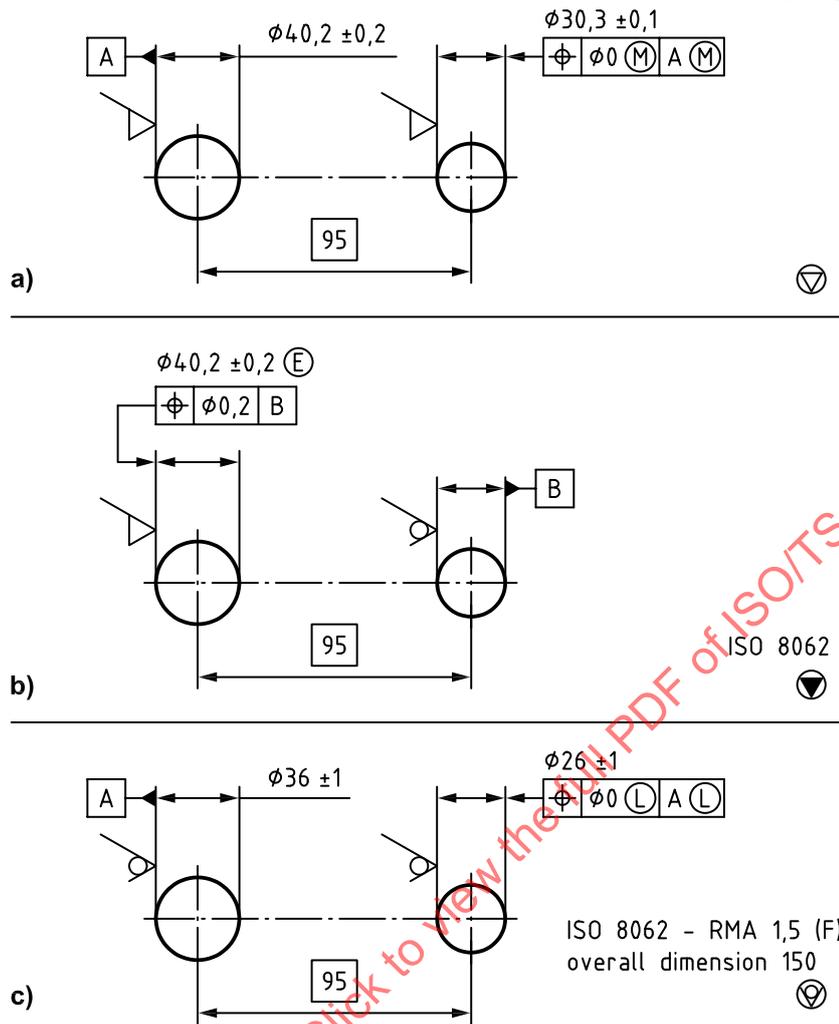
Feature of size (hole) relative to a cylindrical datum feature, requirements; a) final machined, b) intermediate machined, c) final moulded
